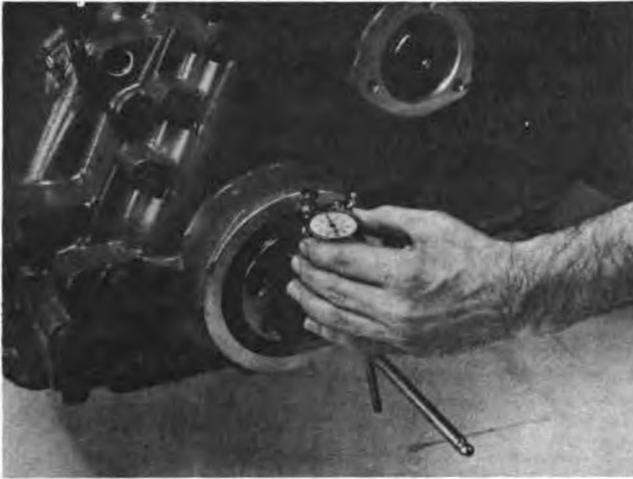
(N114265). Check The Concentricity Of The Oil Seal Bore.
